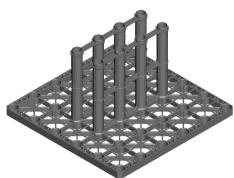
Insert and click the 2 STM Inner panels into the large bottom plate in given centre locations using a dead blow hammer. To make and STM-02 Units.
